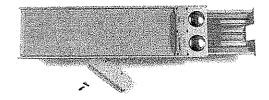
Direction of Sliding the Front Panel Assembly from Back Housing Assembly
